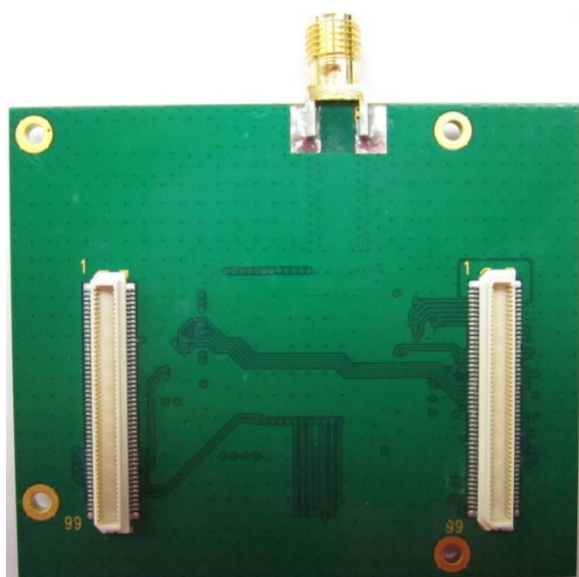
AirPrime WS6318 Socket Board (Bottom View)
